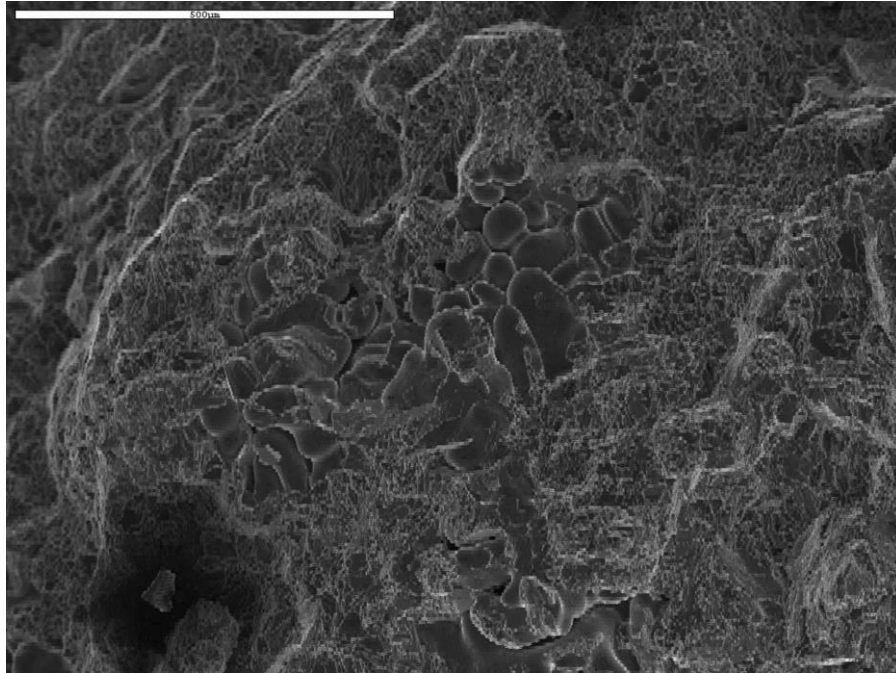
Pores exposed on the fracture surface of the tensile specimen.
